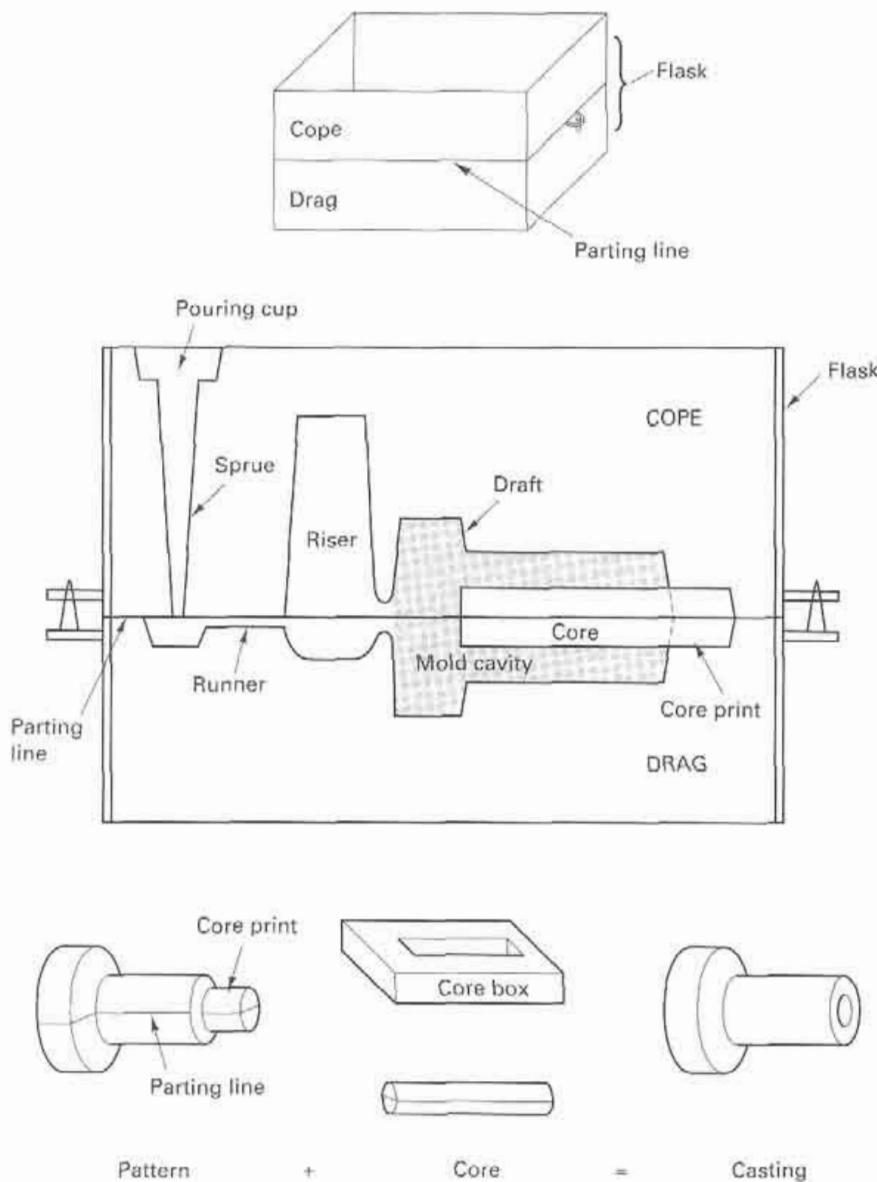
Cross section of a typical two-part sand mold, indicating various mold components and terminology.
